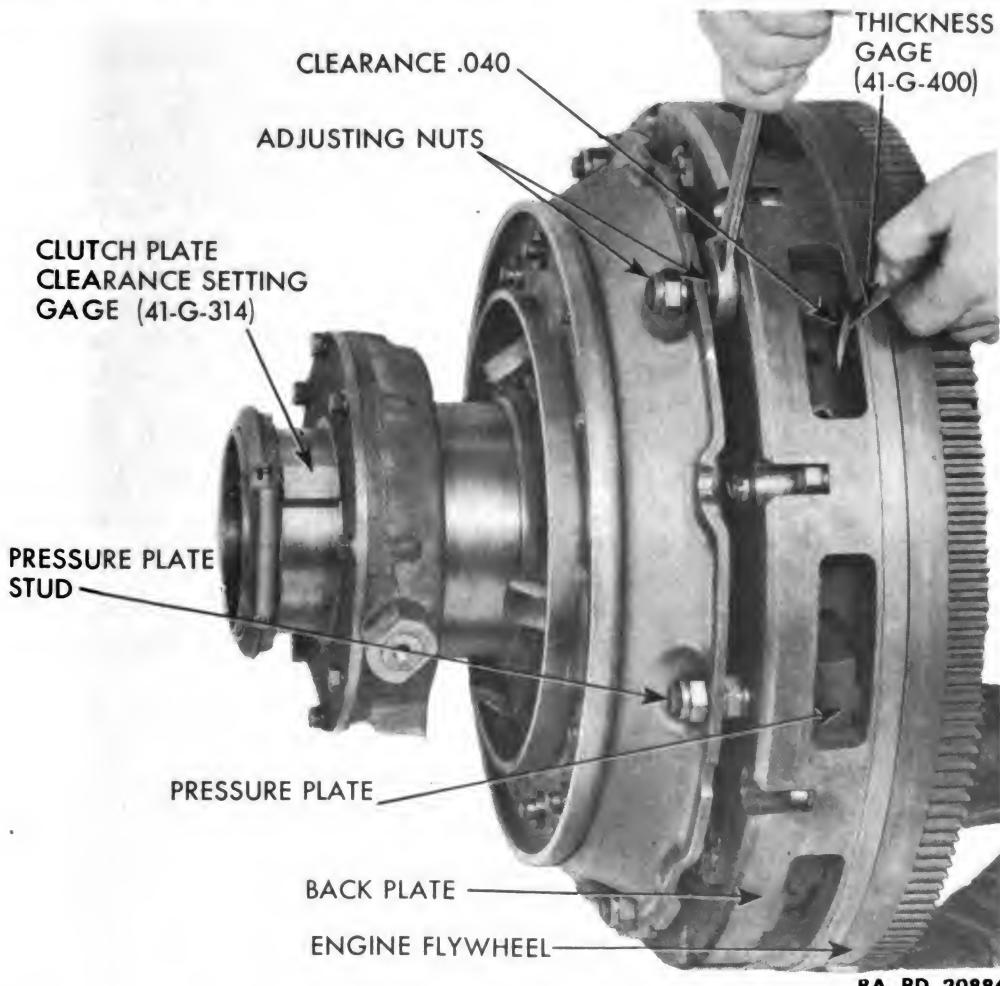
Adjusting Clutch Pressure Plate with Clutch Plate Clearance Setting Gage and Thickness Gage
